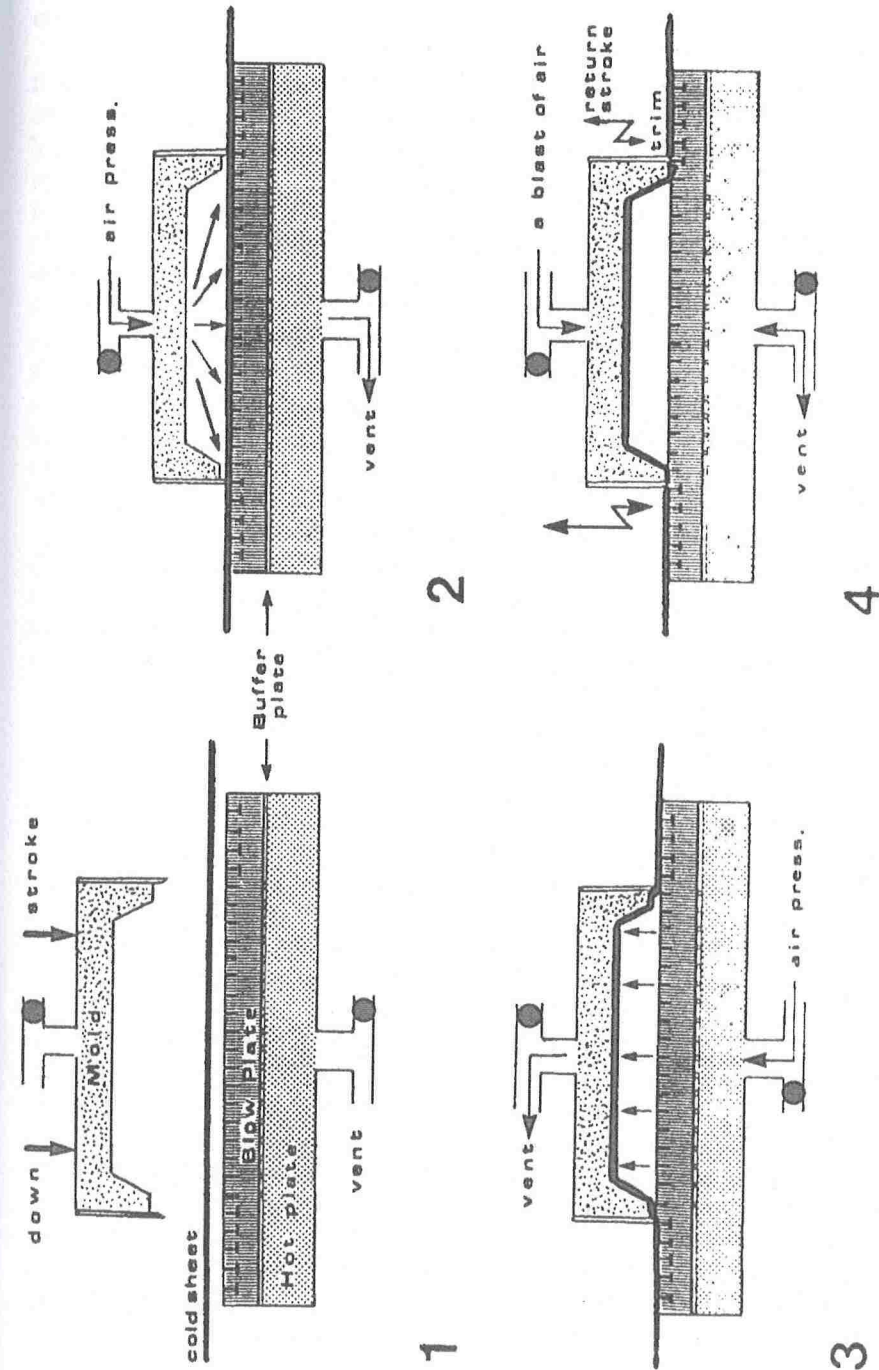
Trapped sheet, contact heat/pressure forming: (1) sheet clamping; (2) sheet heating; (3) forming; (4) trimming and stripping.
